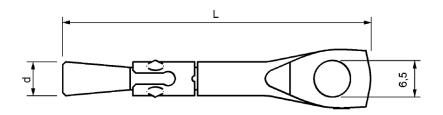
TT-THROUGHBOLT steel expansion fasteners dimensions, version TWH
